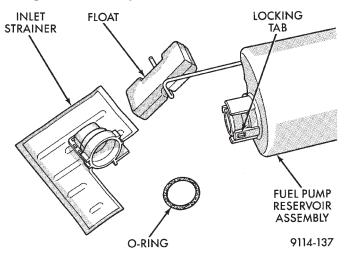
Fuel Pump Inlet Strainer—Front Wheel Drive
